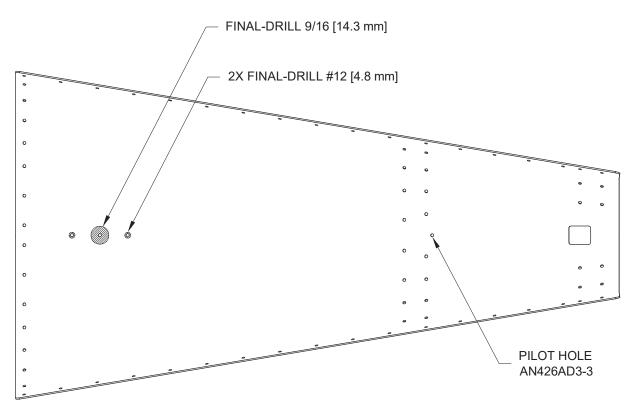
F-01479 AFT BOTTOM SKIN (TRI-GEAR)
